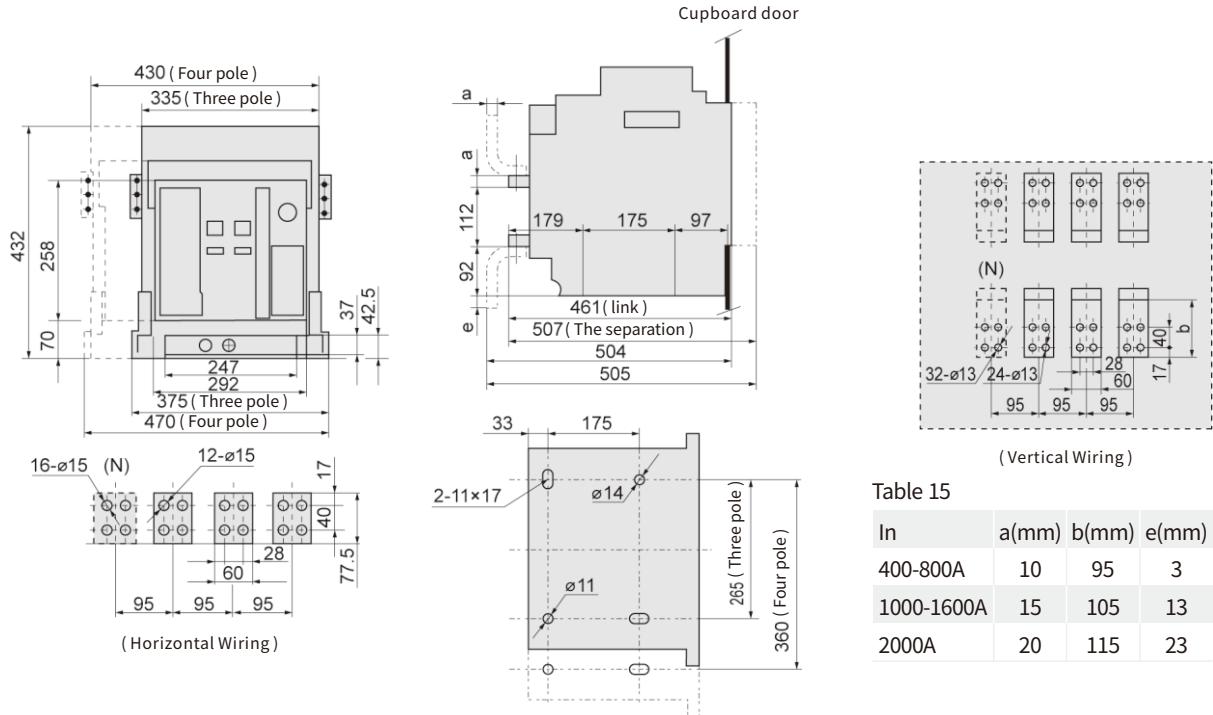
Outline and installation dimensions of drawout type circuit breaker (EKA1-2000, 2000/4)
